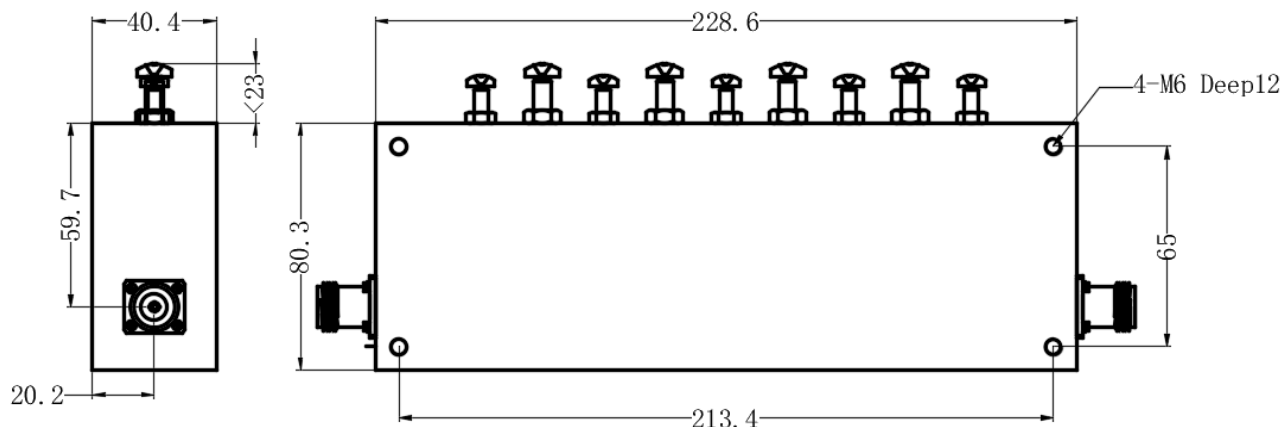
JX-CF1-158.3M161.8M-1MNT front panel layout
